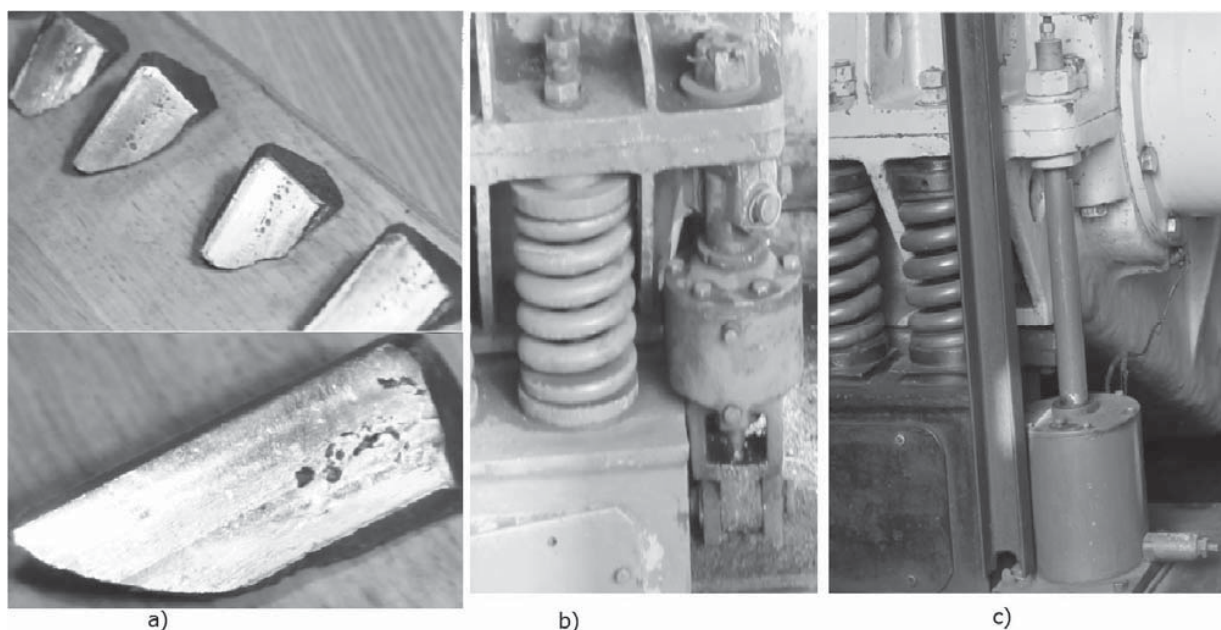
Buffer types of winding machines in Lonea and Livezeni Mines
